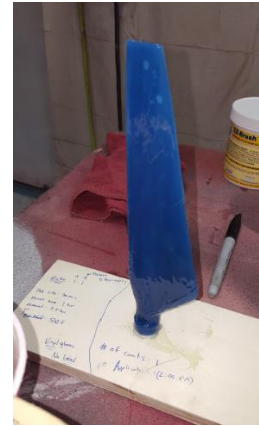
RIGHT. Wax mold coated in silicone to create the bladder
